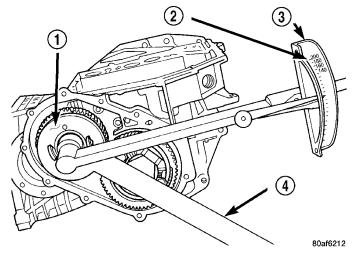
Tighten Transfer Gear Nut to 271 N• m (200 ft. lbs.)
